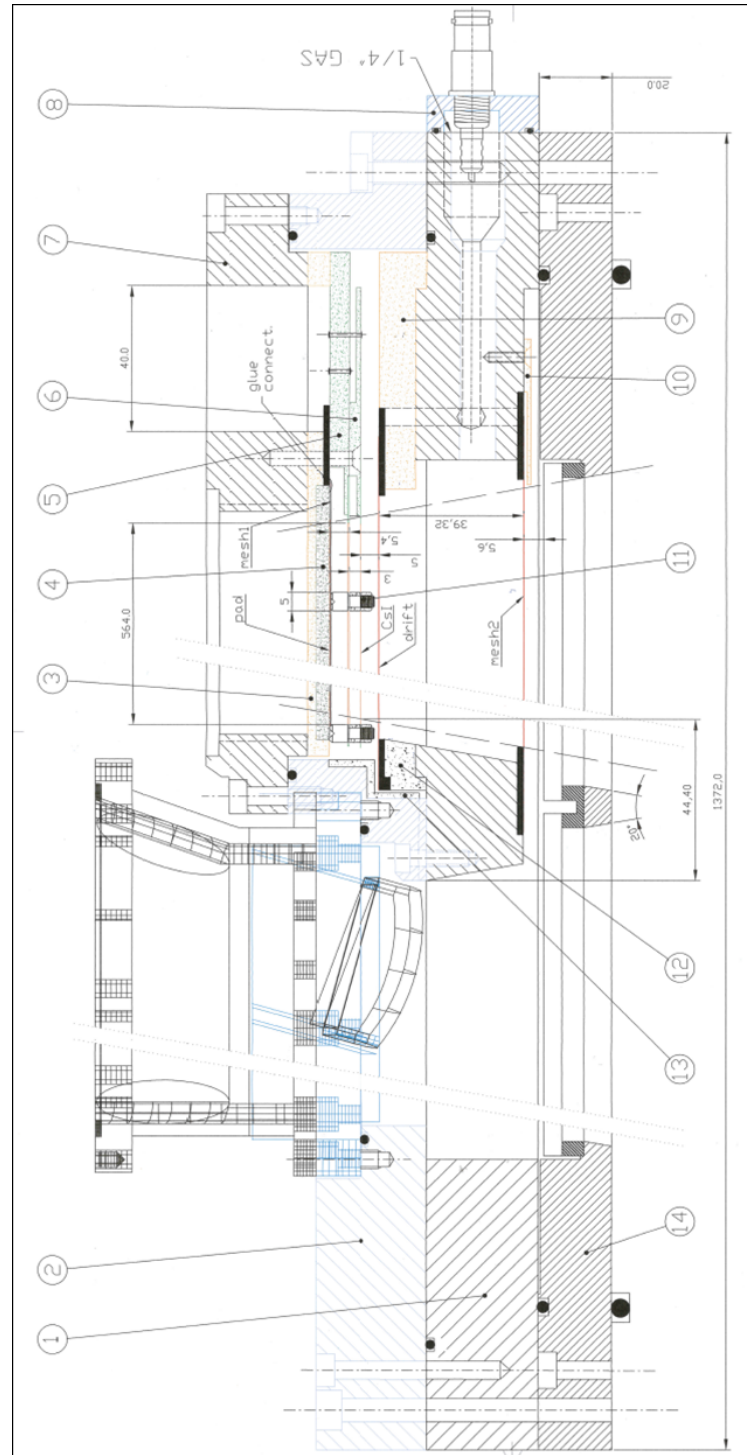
Section of technical drawing of the final chamber with Hybrid PD and MAPMT frames: 1. Wire frame 2. Spacer frame 3. Anodic TUFNOL 4. Anode PCB 5. HV-THGEM2 PCB 6. HV-THGEM1 PCB 7. Hybrid frame 8. Wire HV cover 9. Drift wire HV TUFNOL 10. Field wire TUFNOL 11. THGEM pillars 12. Drift wires central TUFNOL 13. Central isolation TUFNOL 14. Quartz frame
